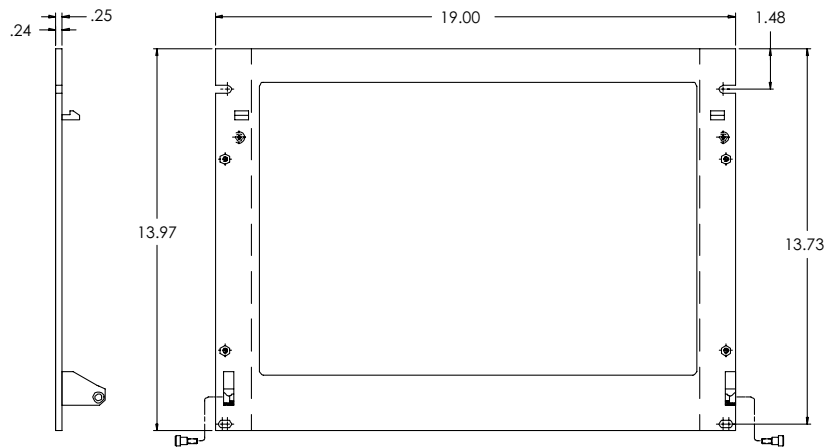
VXI PLUG AND PLAY MOUNTING PLATE FOR 8U CHASSIS. PART # 310 113 248
